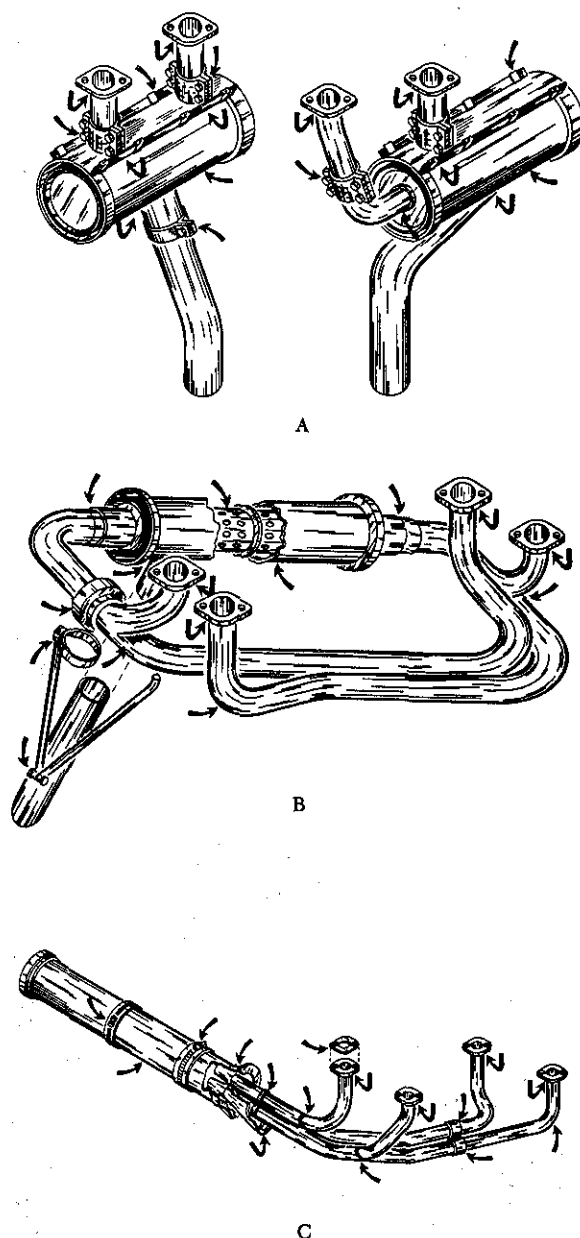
Primary inspection areas (A. Separate system; B. Crossover-type system; C. Exhaust/augmentor system.)
